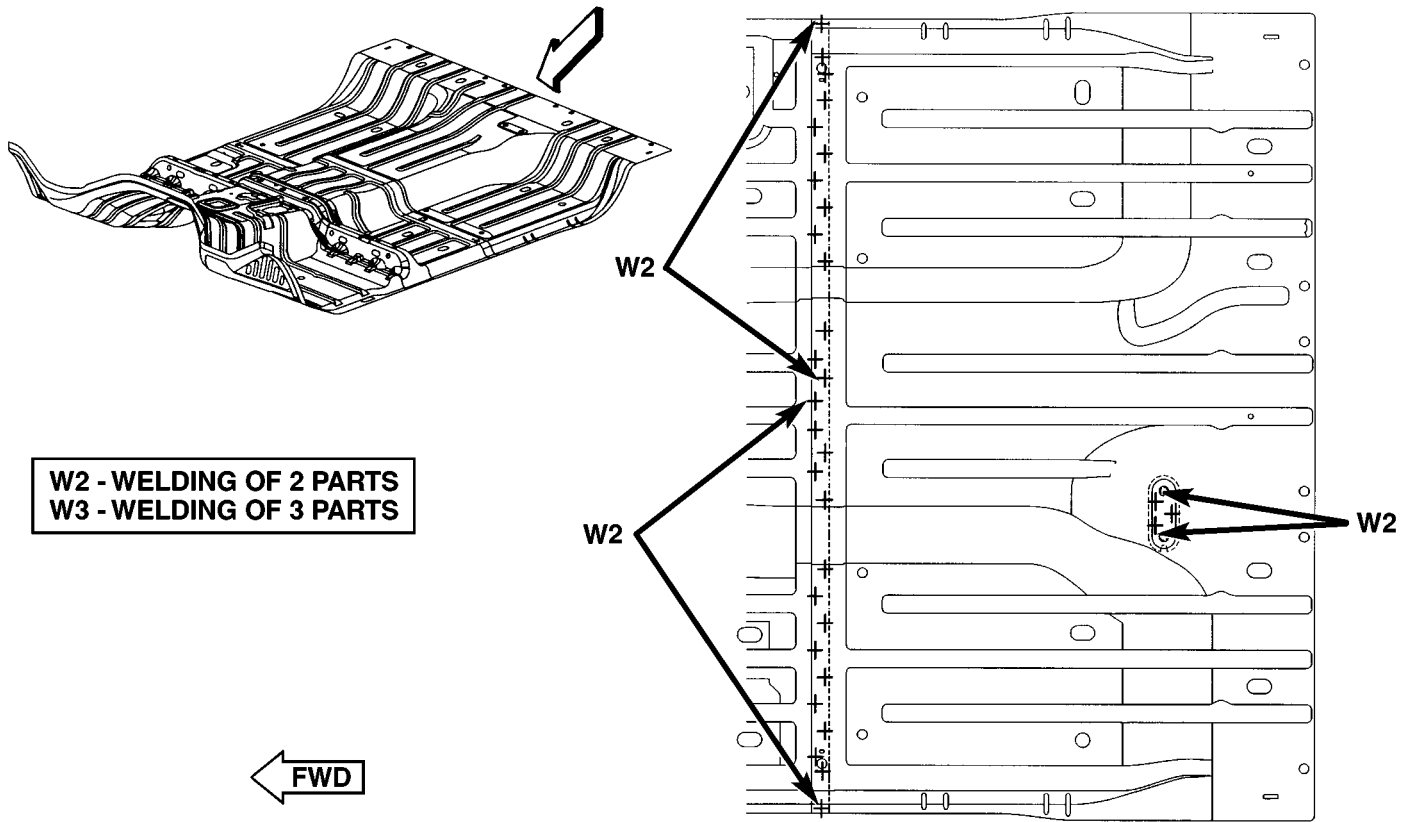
REAR SEAT MIDDLE MOUNTING PLATE - QUAD CAB
